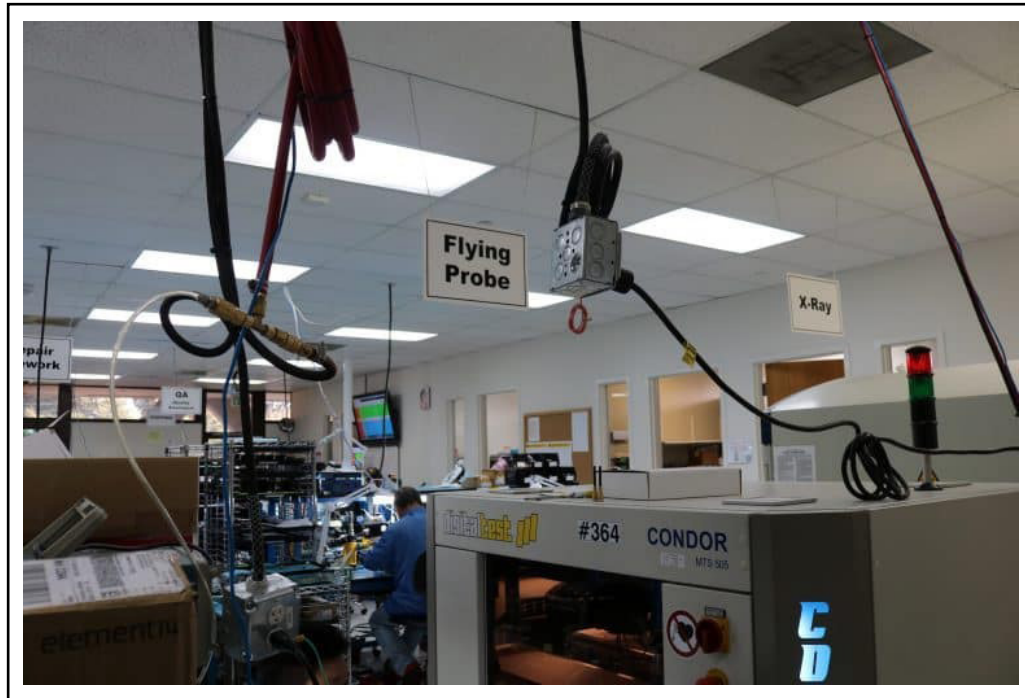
Flying probe tester at the Sierra Circuits assembly facility
